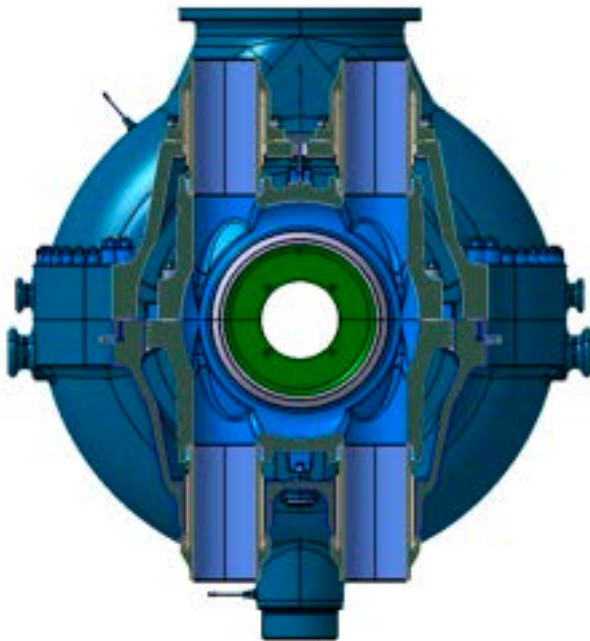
Typical Horizontal Stud Bolt Arrangement (for reference only)
